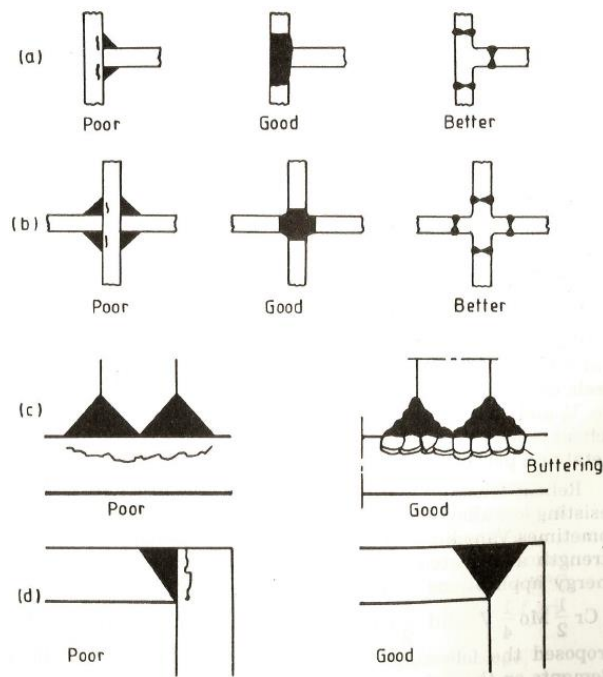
Joint design improvements to control lamellar tearing: (a) and (b) replace fillet welds with solid forged sections or weld metal, (c) buttering, (d) modified corner joint [50]
